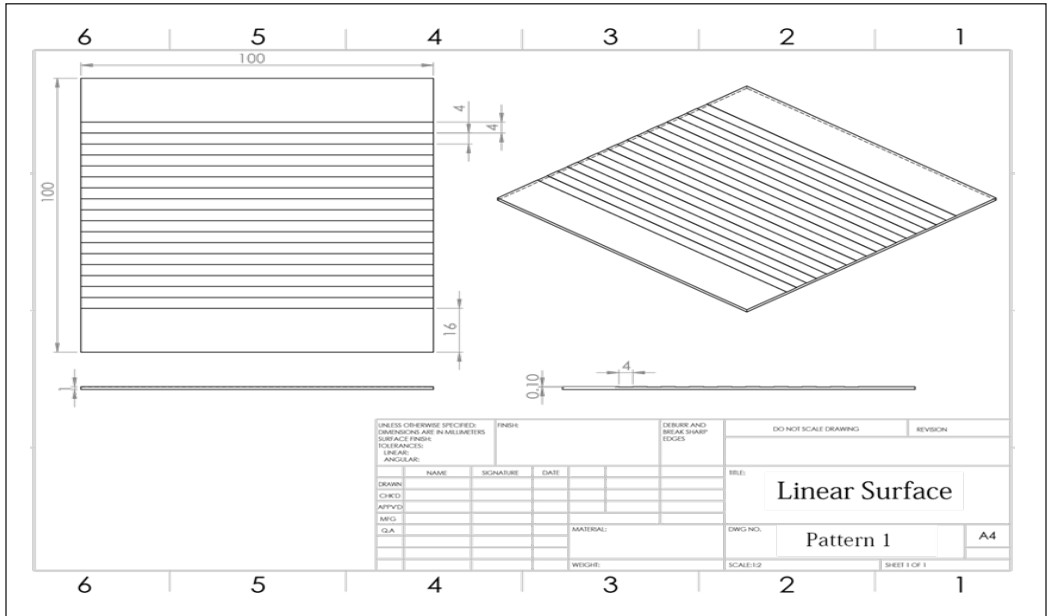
The surface texture design of the electrode plate with a linear pattern (unit dimension = mm)
